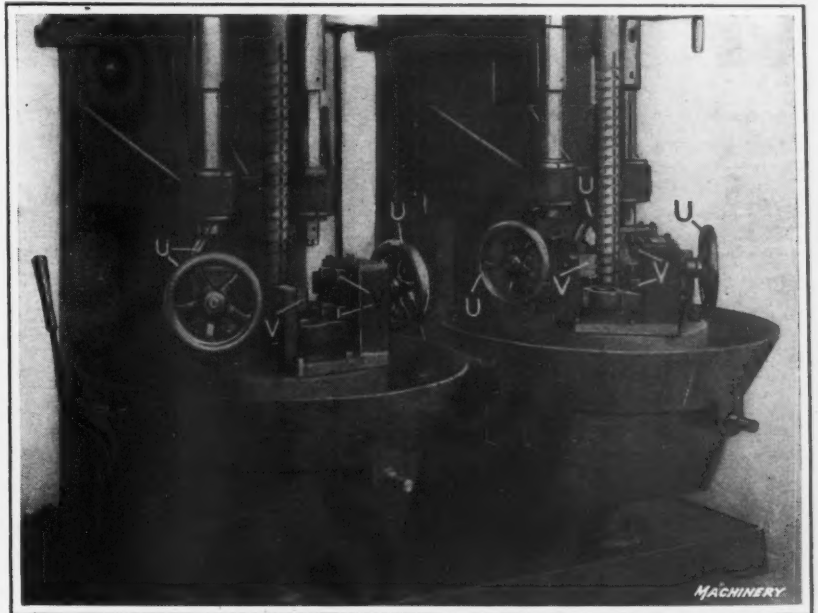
Gang Type of Baker Continuous Drilling Machine equipped for boring and reaming Motor Car Spring Seats
